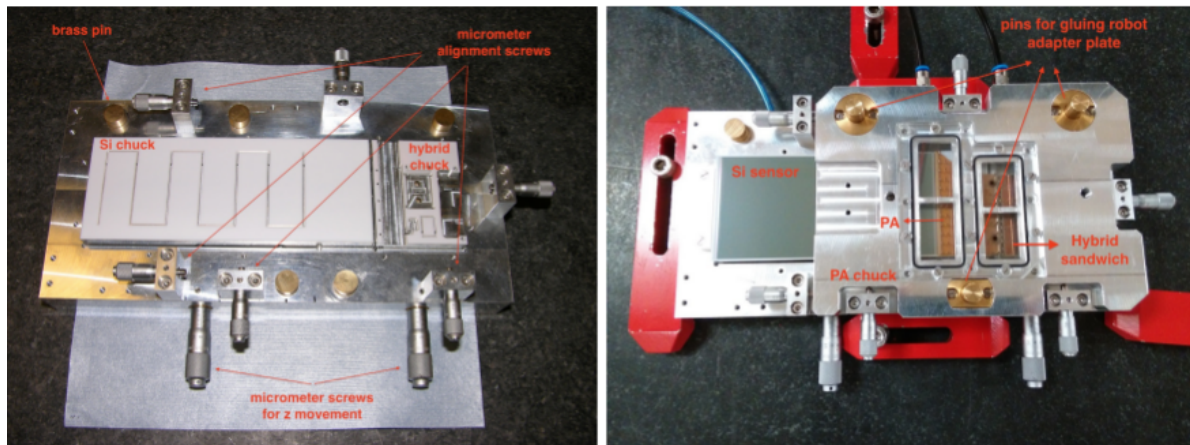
Left: the jig for the mechanical assembling of the module; sensors and HS supports are labeled in red, as well as the micrometer screws and the brass pins for the PA chuck positioning. Right: the PA chuck in place onto the jig.
